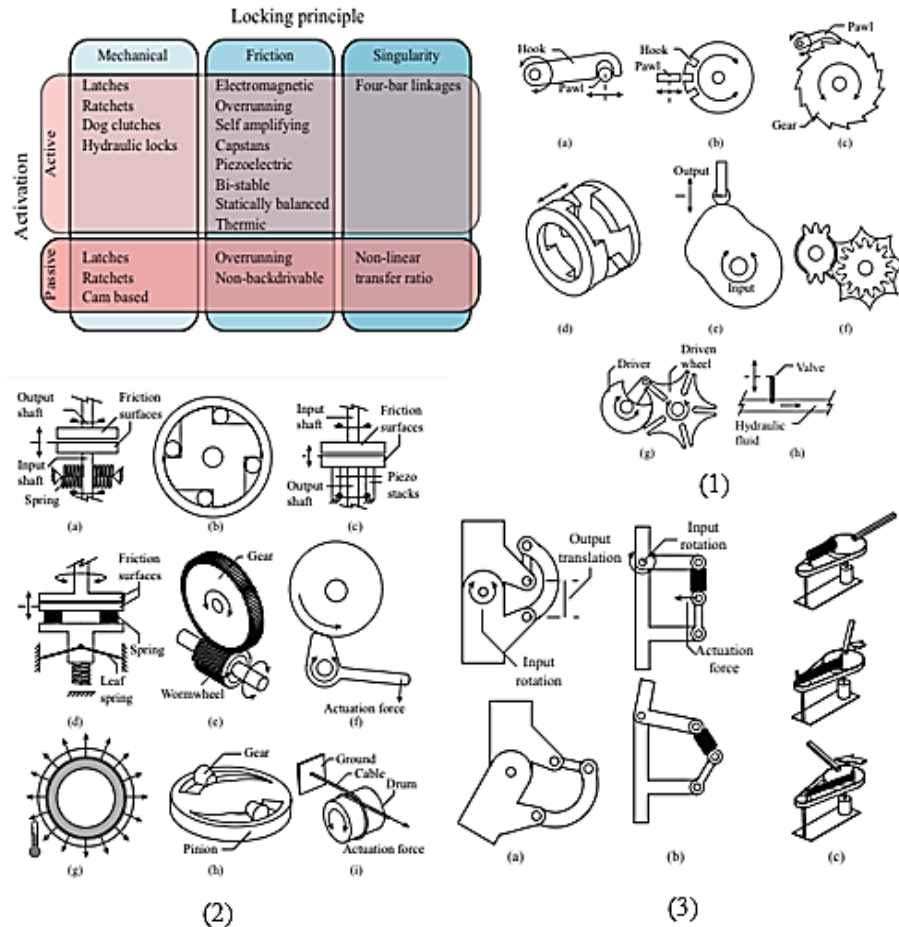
Locking mechanisms for actuators (Reprinted from [27]). 1- Mechanical mechanisms 2- Friction-based mechanism 3- Singularity mechanisms Conceptual Designs
